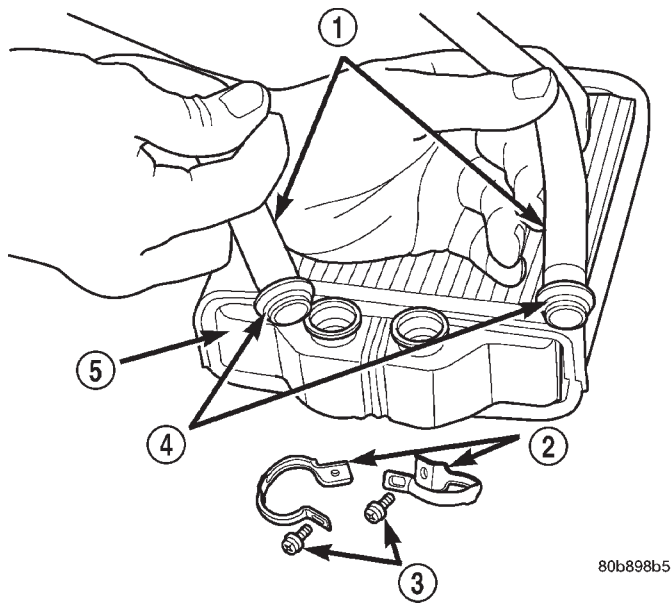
HEATER CORE, TUBES, AND O-RINGS
